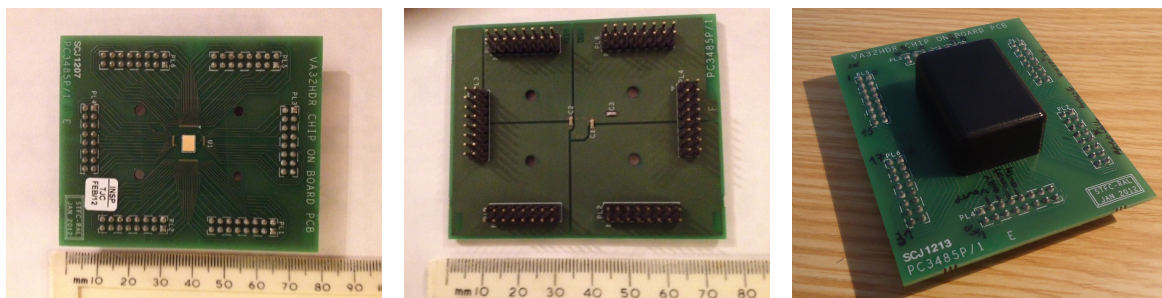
Photos of the ASIC daughter board (top, bottom and fully assembled views).
